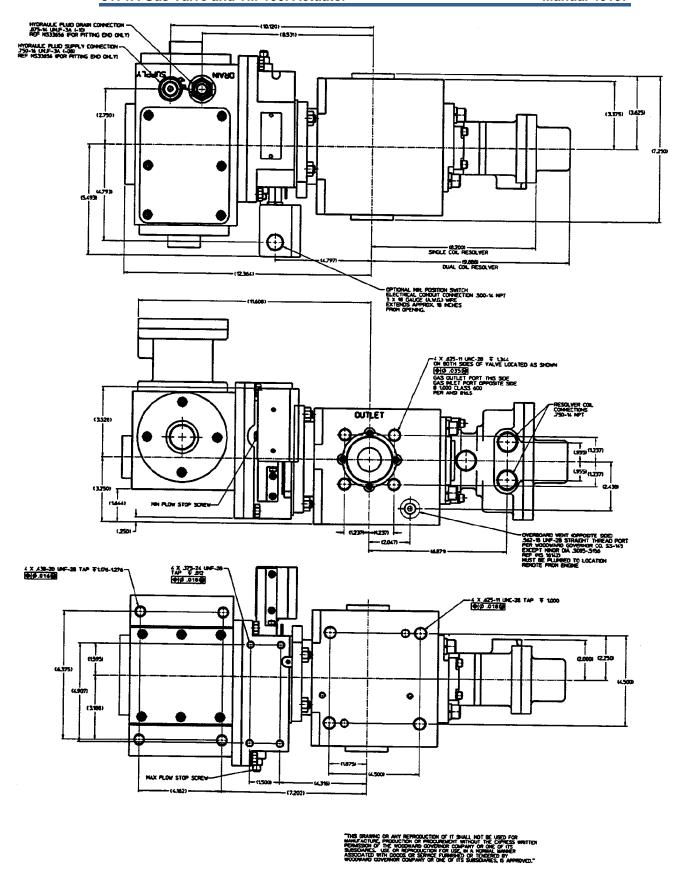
TM-100i Actuator/3171A Gas Valve Outline Drawing
